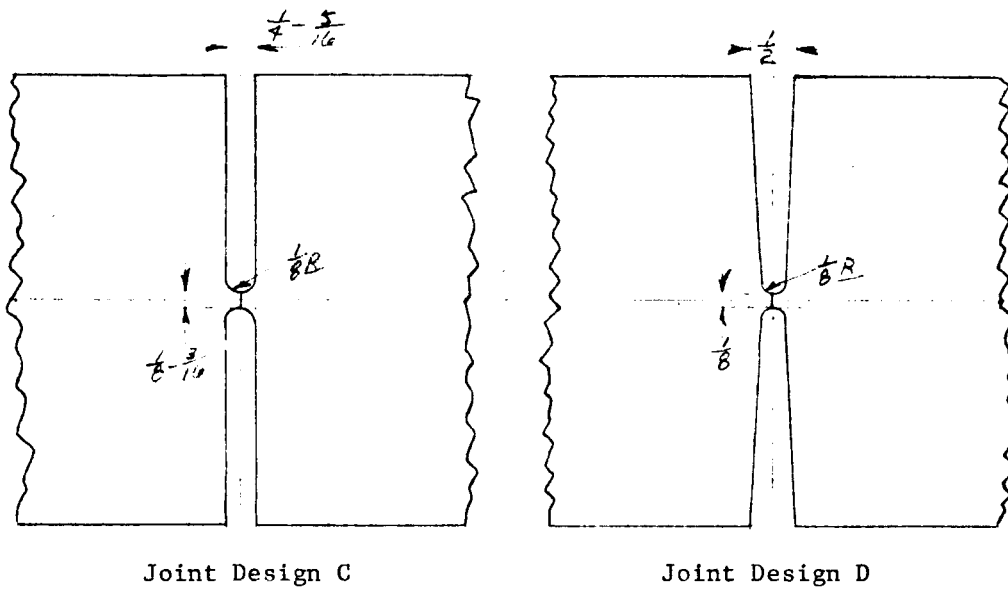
JOINT DESIGNS USED FOR NARROW-GAP WELDING 1-, 2-, AND 3-INCH-THICK 2219-T31 ALUMINUM ALLOY TEST PLATES
